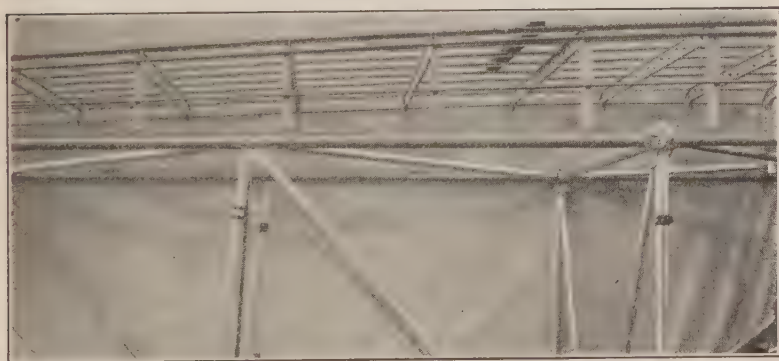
Falsework on duralumin tube fuselage. (Courtesy Curtiss Aeroplane & Motor Co., Inc.)
